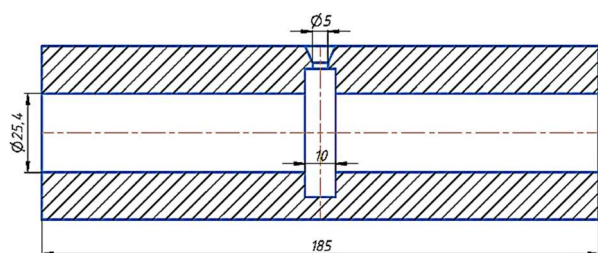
Sketch of the pipe grid for a single-pipe specimen
